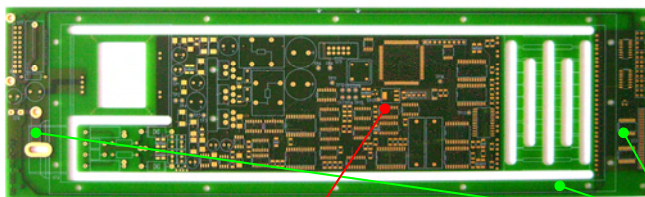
Printed Circuit Board (PCB) of HV-detector UNIQD TYPE 3420 (new design)
